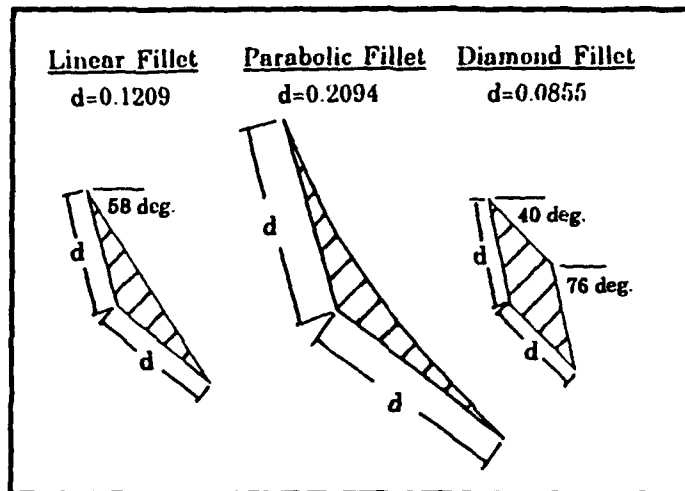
Kern's Fillet Dimensions [Ref. 8]
